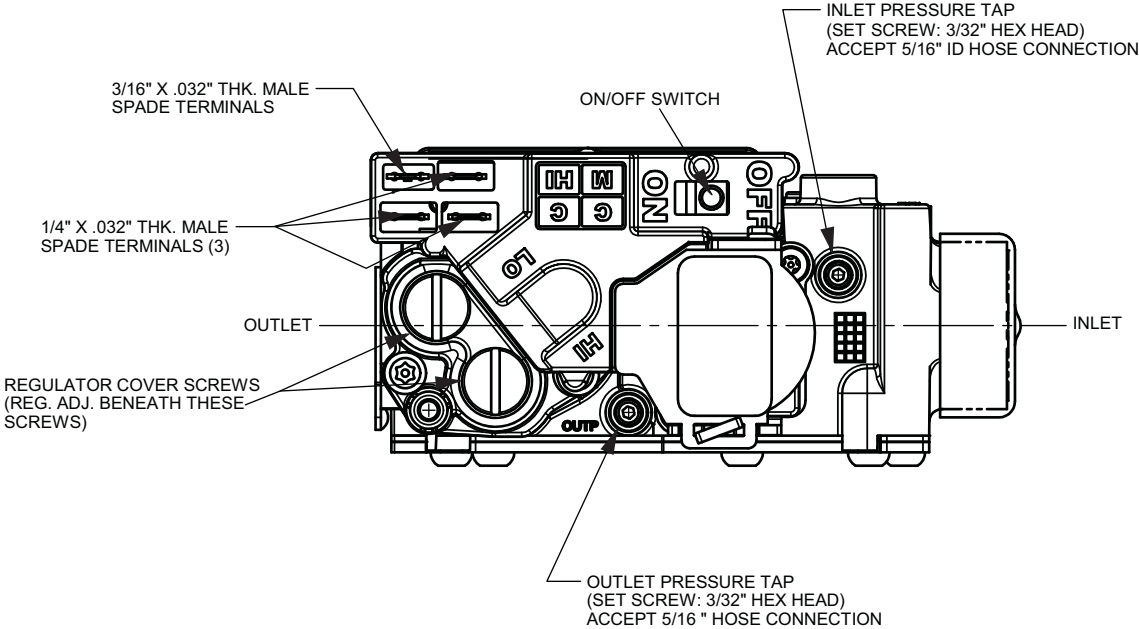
3 Thru 6 Ton, 1/2" Two Stage Gas Valve
